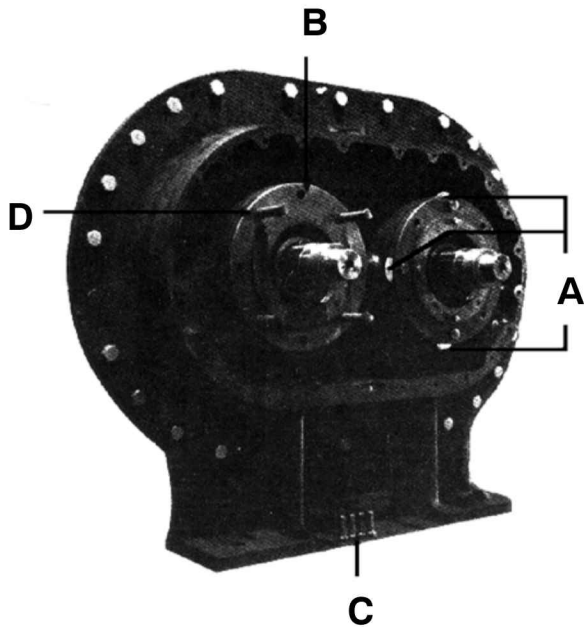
BEARING CARTRIDGE REMOVAL
